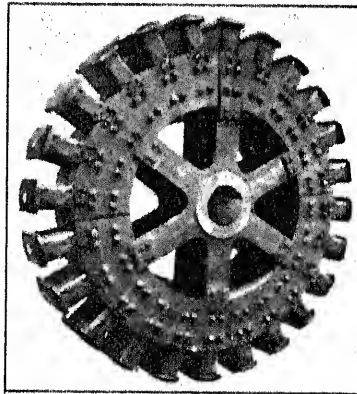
ROTOR OF A LARGE WATERWHEEL-DRIVEN ALTERNATOR OF RECENT DESIGN USING STEEL PLATE CONSTRUCTION
